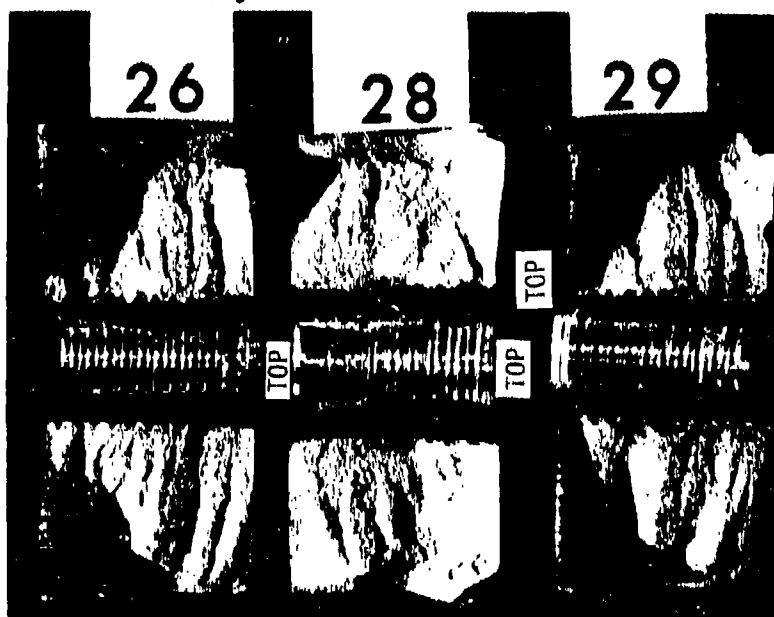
Close-up of Fatigue Failure of Specimens with Heli-Coil 1/4-28 Size Inserts. Torqued Bolts in Inserts During Tests.
